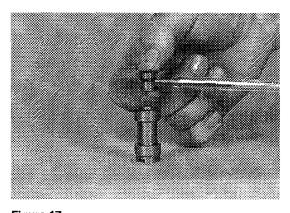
Remove regulator spool sleeve assembly. Remove "O"-ring.
